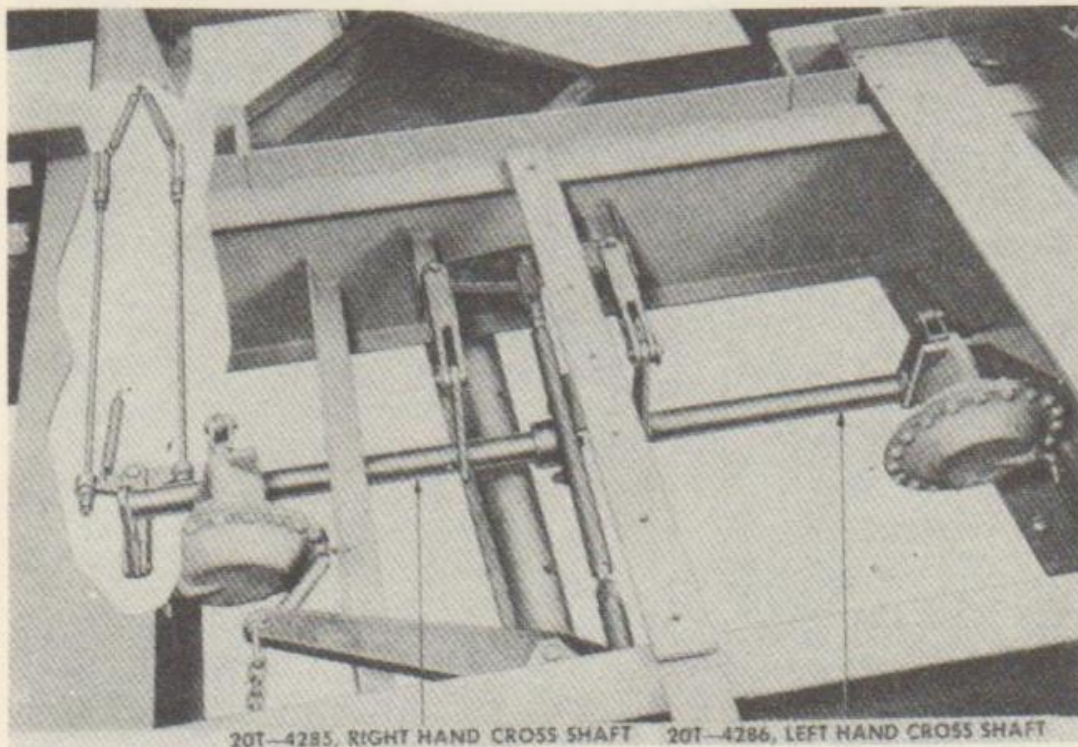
HAND BRAKE CROSS SHAFT AND LINKAGE
